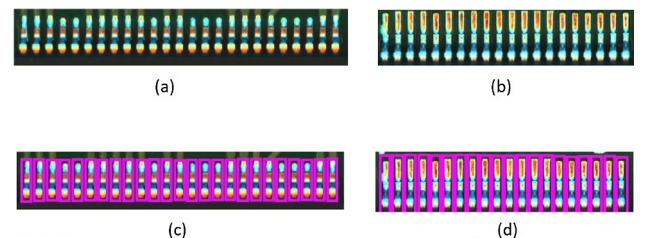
Two PCBs with different layouts and solder patterns. (a) and (b) original PCBs images, (c) and (d) solder bounding boxes.
